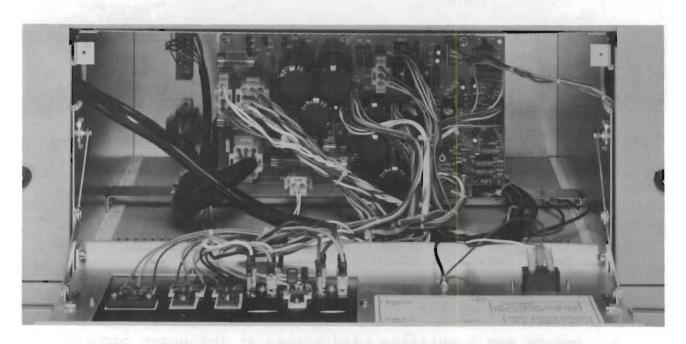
CHECK THE VARIOUS CONNECTORS AND COMPONENTS ON THE POWER SUPPLY CIRCUIT BOARD AND THE LOWER REAR PANEL.
